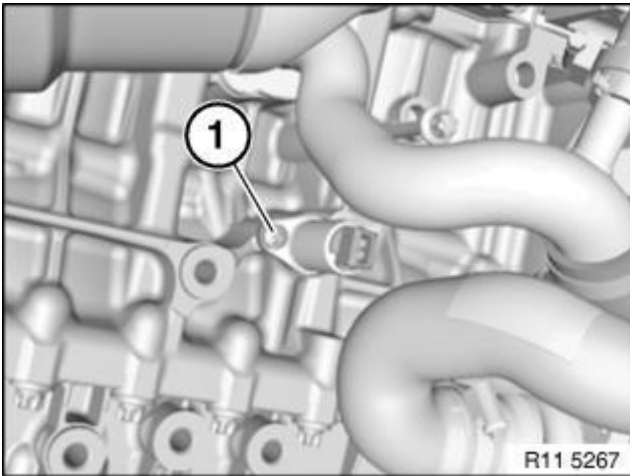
Release Screw (1) And Remove Hydraulic Valve (2)
